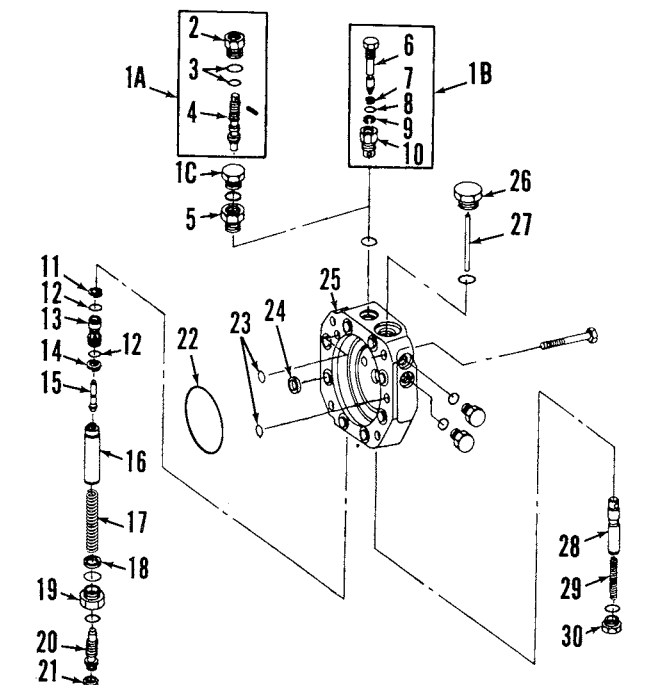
Exploded view of pump stroke control valve housing showing component parts. Items in inset (1A) show early style manual destroke components. Items in inset (1B) show late style manual destroke components. Plug (1C) is used when pump is not equipped with manual destroke.
